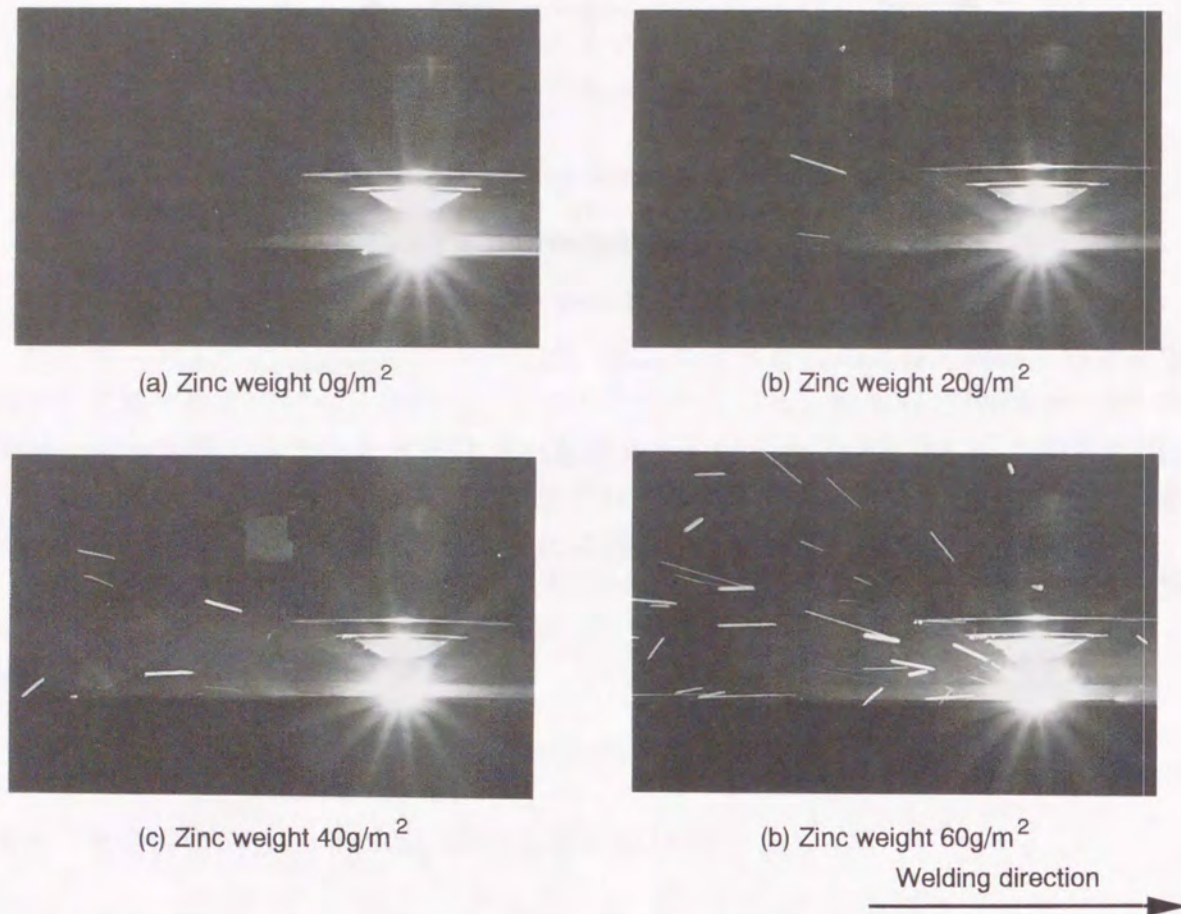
Sputter generation during laser welding of zinc coated steel sheet
